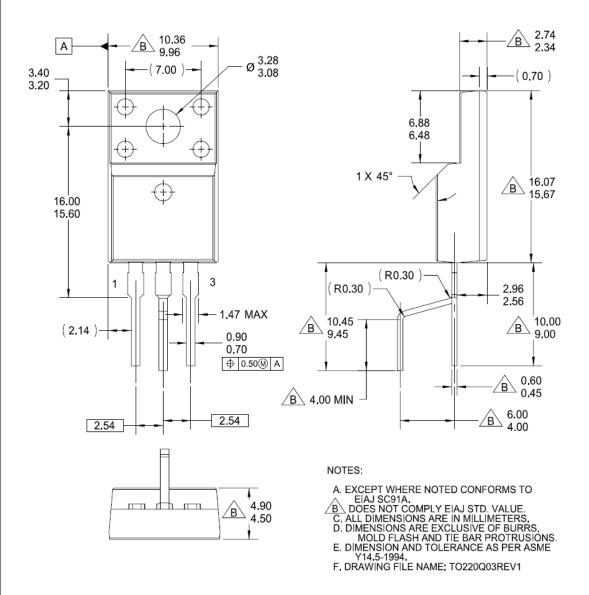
TO-220F 3L - TO220, Molded, 3LD, Full Pack, EIAJ SC91, Y formed lead
